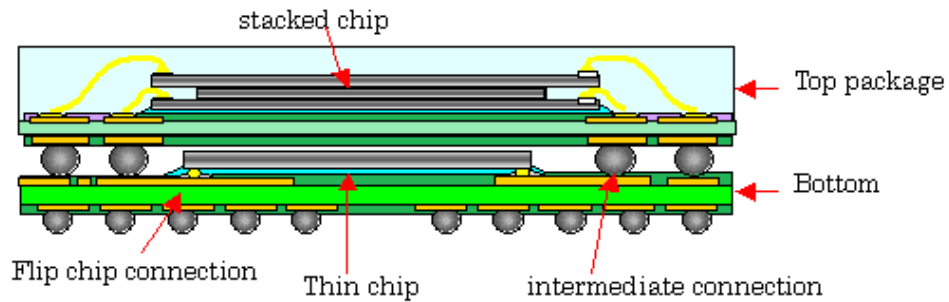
Package on Package (Source: Shinko Electric Industries Co., LTD)
